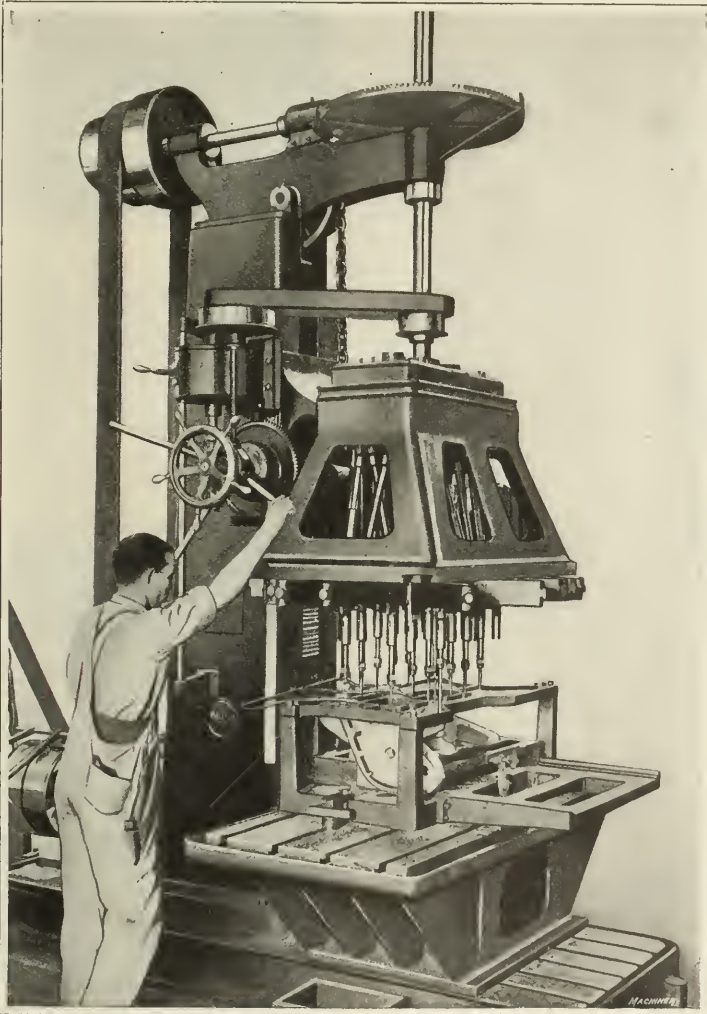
Plate Bushing Holders used in machining Crank-cases on Multiple-spindle Drilling Machine
